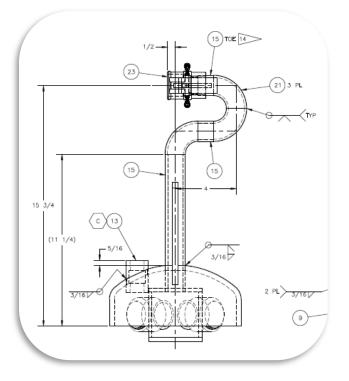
Engineering drawing of IXC endcap FLORIDA INTERNATIONAL UNIVERSITY
